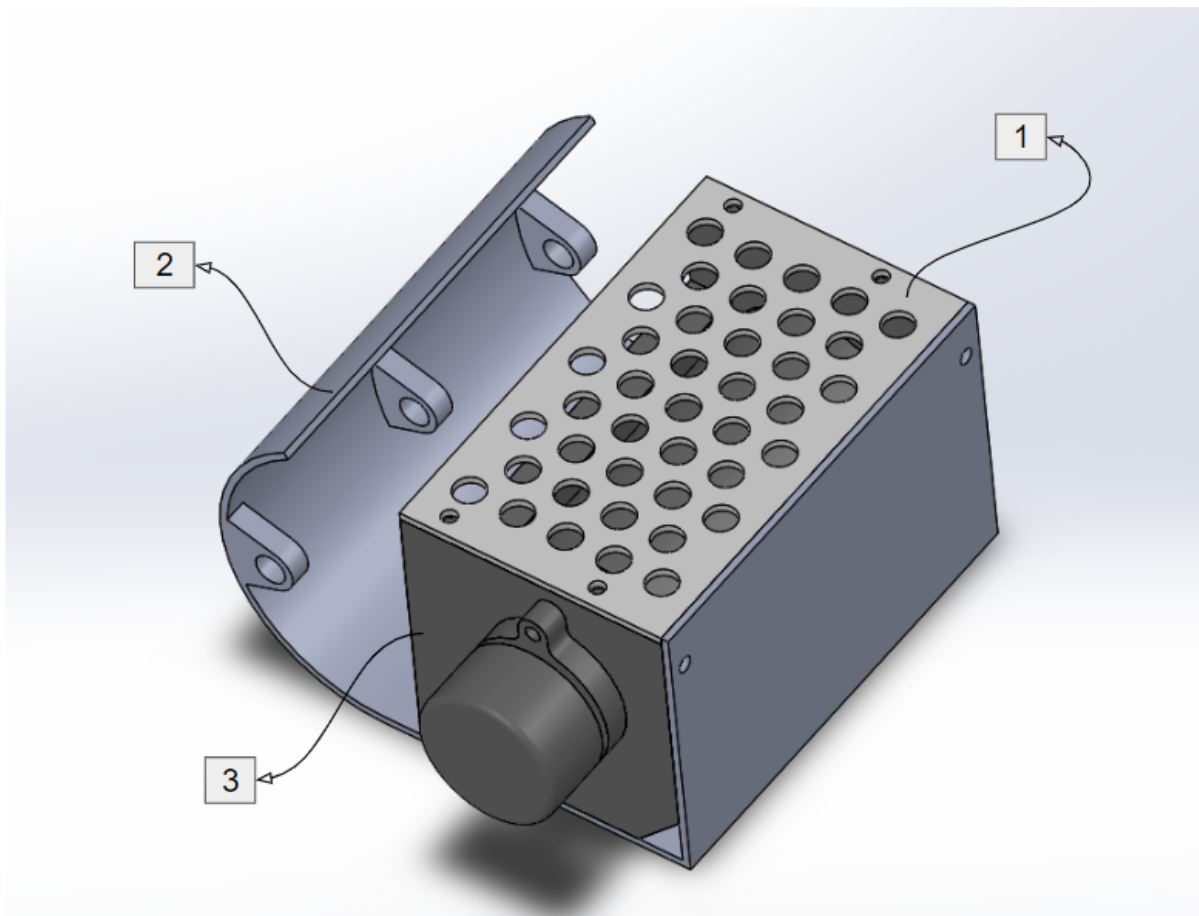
3D model of the cooler created with SOLIDWORKS highlighting the main structural parts
